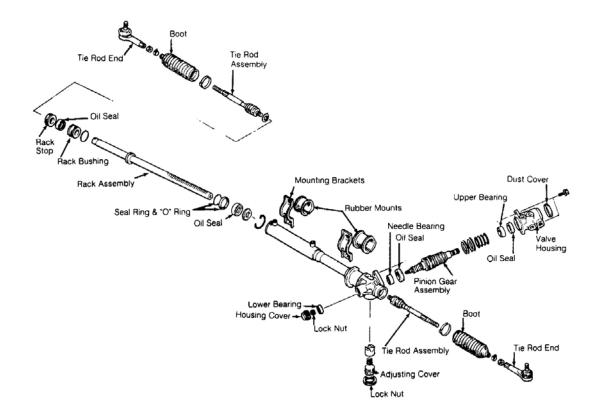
Exploded View of Rack & Pinion Steering Gear (929) Courtesy of MAZDA MOTORS CORP.
